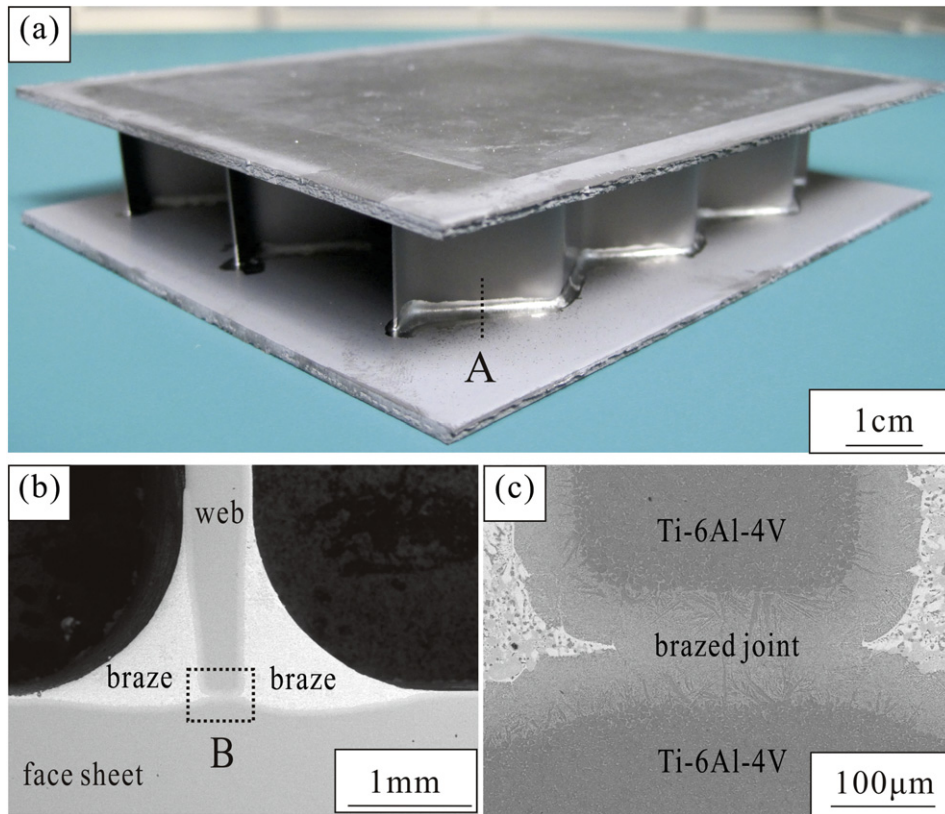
Images of brazed joint between core web and face sheet: (a) brazed sandwich panel; (b) low magnification view of brazed joint A in (a); (c) high magnification view of brazed gap B in (b).
